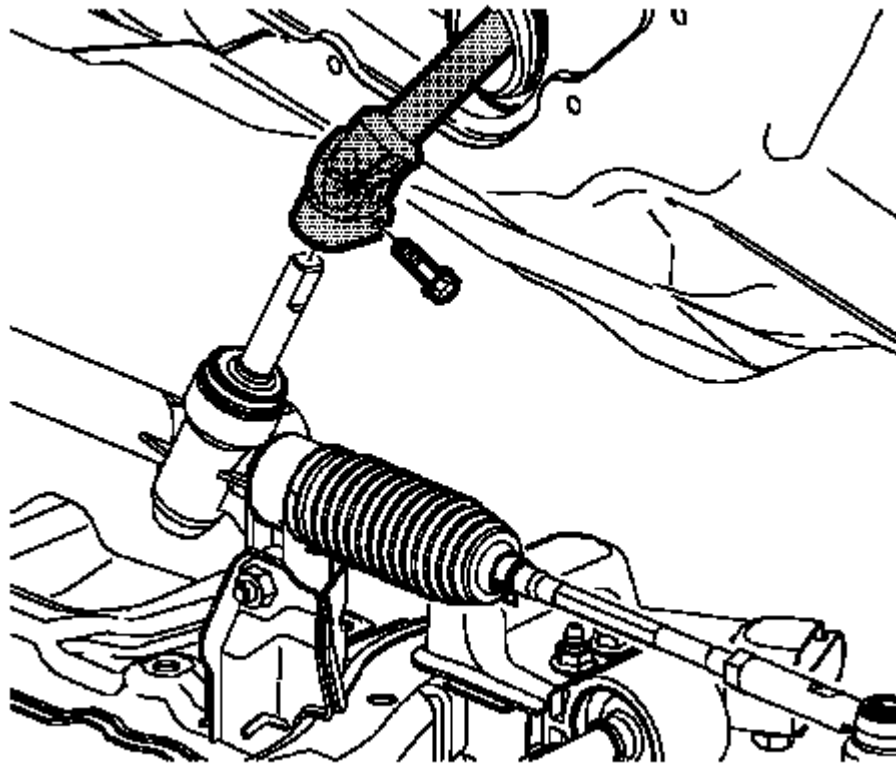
View Of Steering Shaft To Intermediate Shaft
